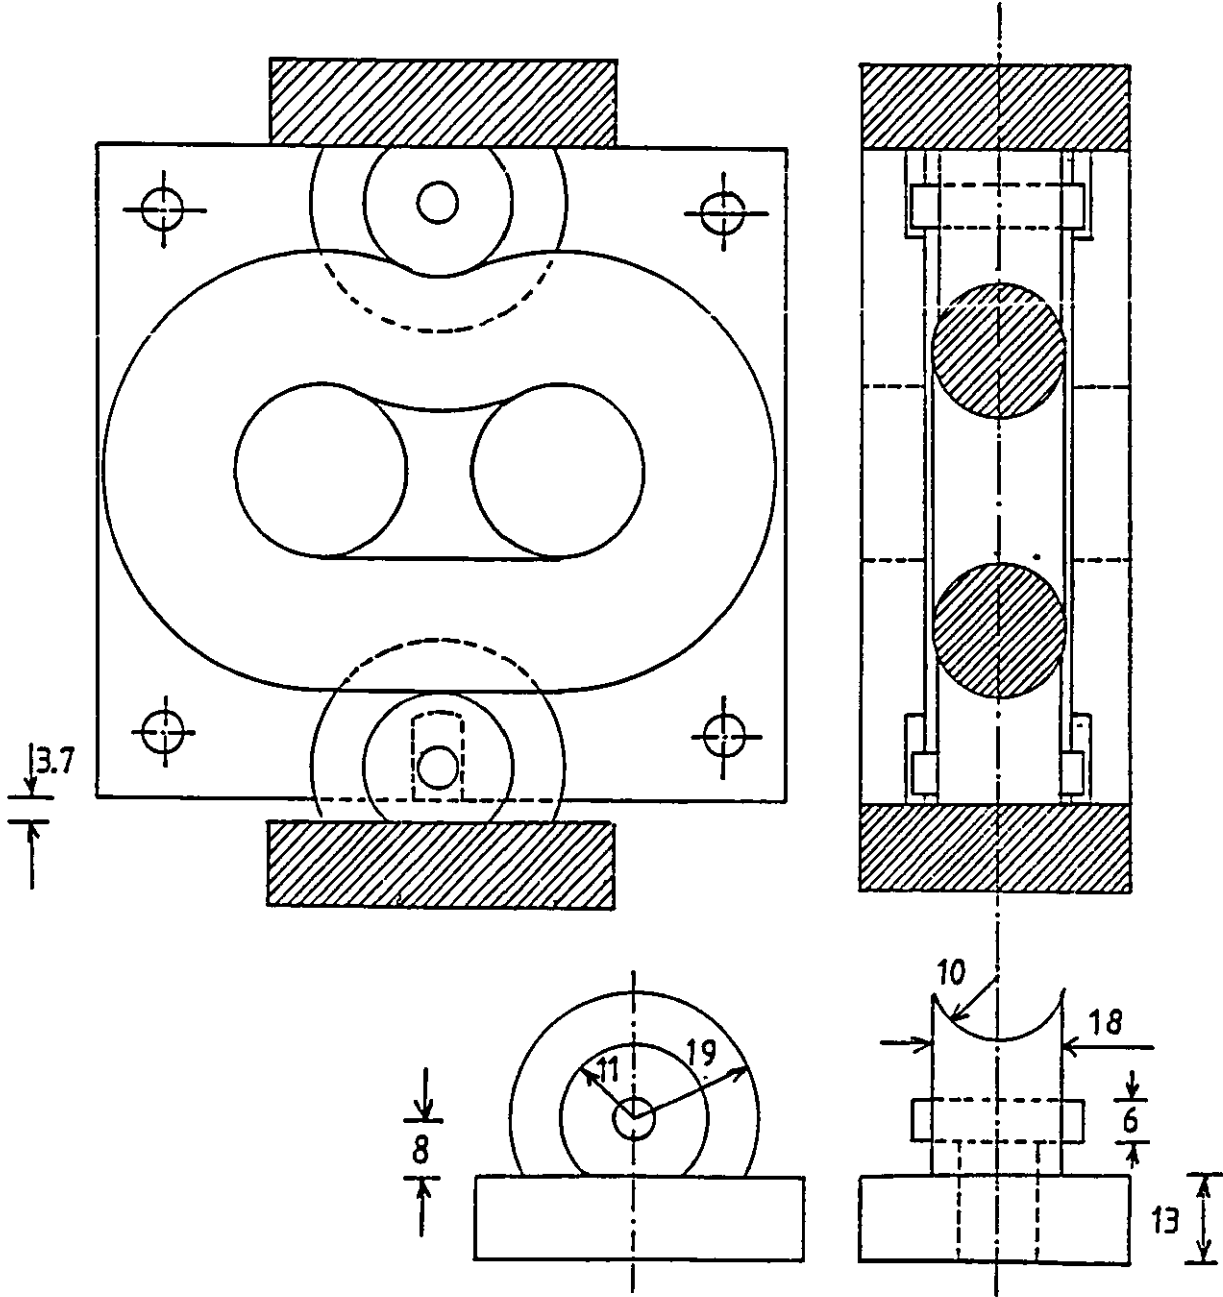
Sketch of the arrangements used to form eight shape link.
